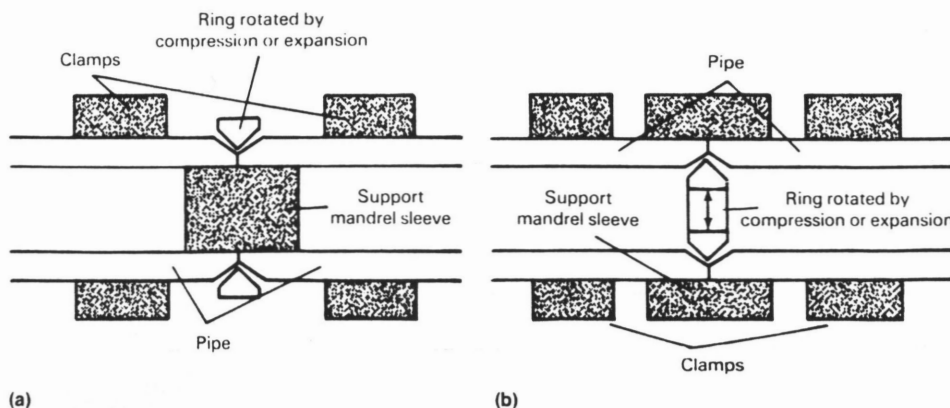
Radial friction welding. (a) Using compression. (b) Using expansion
